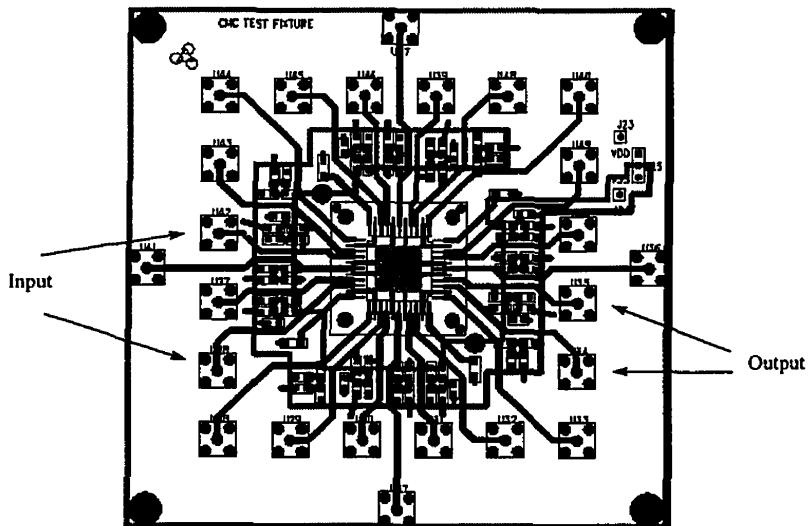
Layout of Printed Circuit Board Test Fixture
